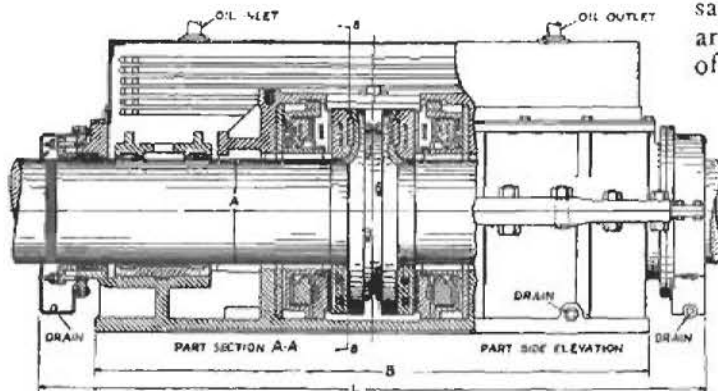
Special mounting for naval vessels. Two journals, and a double thrust bearing with split facing collars.
